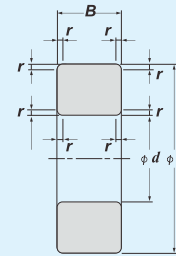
Radial bearing (excluding tapered roller bearing)
